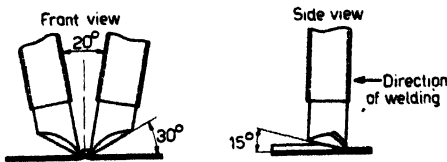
Weibel electrode tongs for seam welding (K.G. Gabler & Co., Bad Aussee, Austria).
